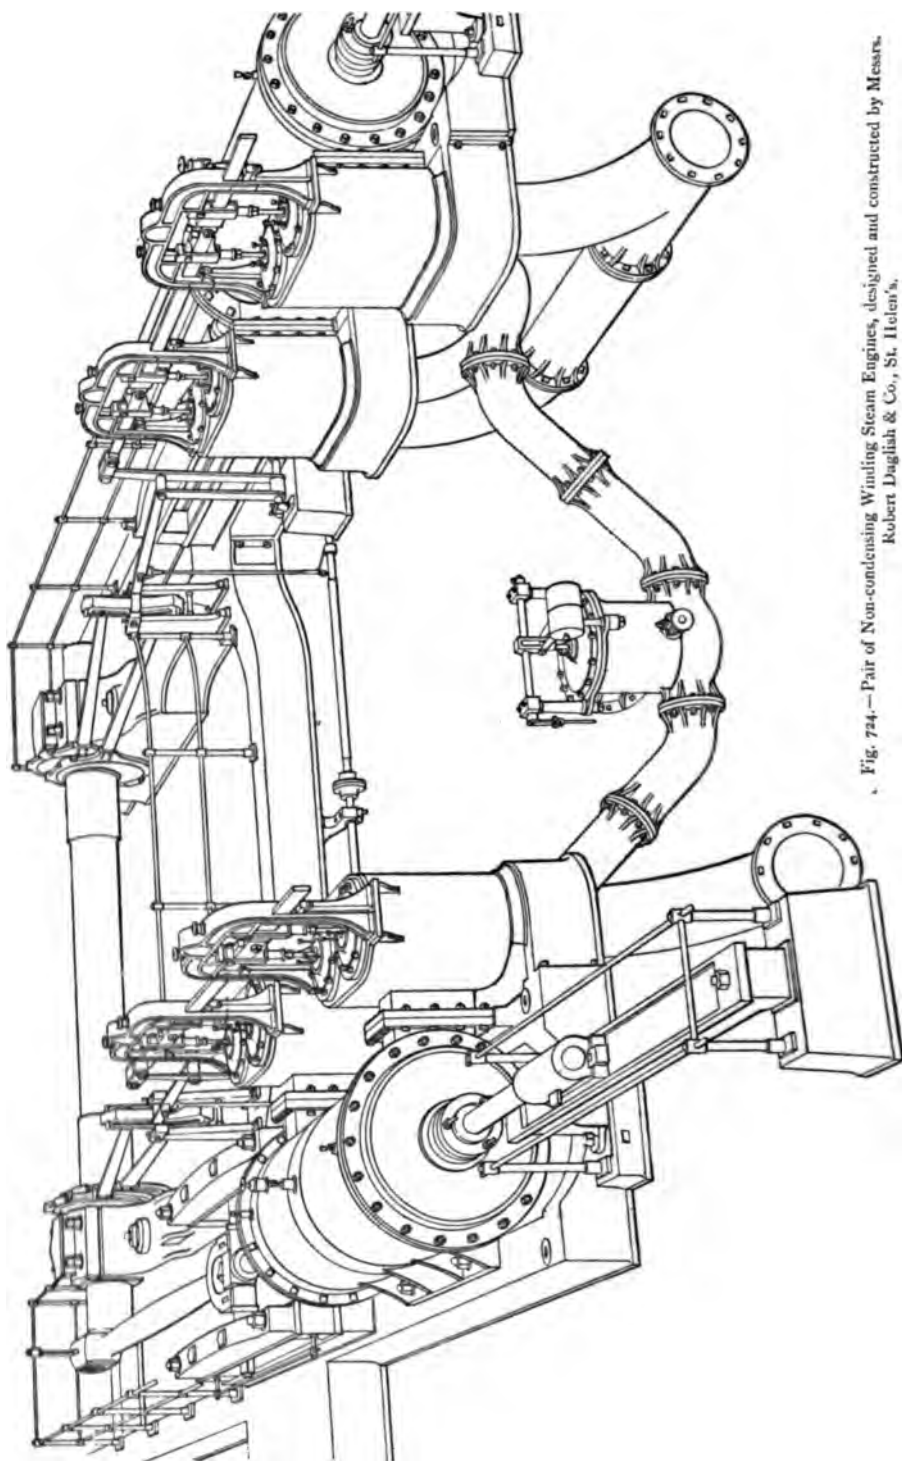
Pair of Non-condensing Winding Steam Engines, designed and constructed by Messrs.
